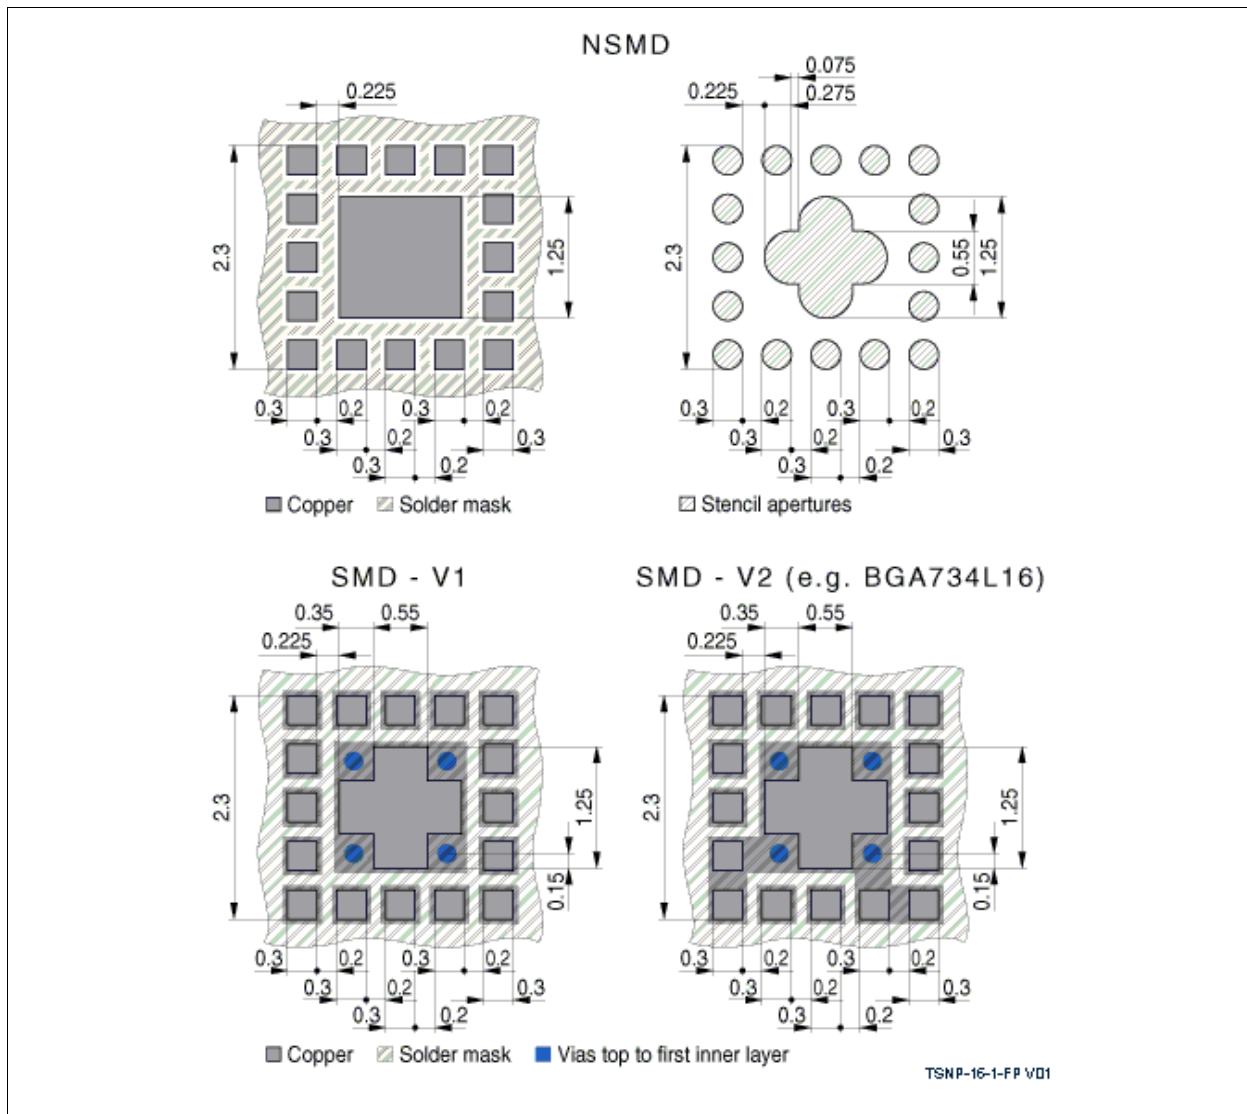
Recommended footprint and stencil layout for the TSNP-16-1 package
